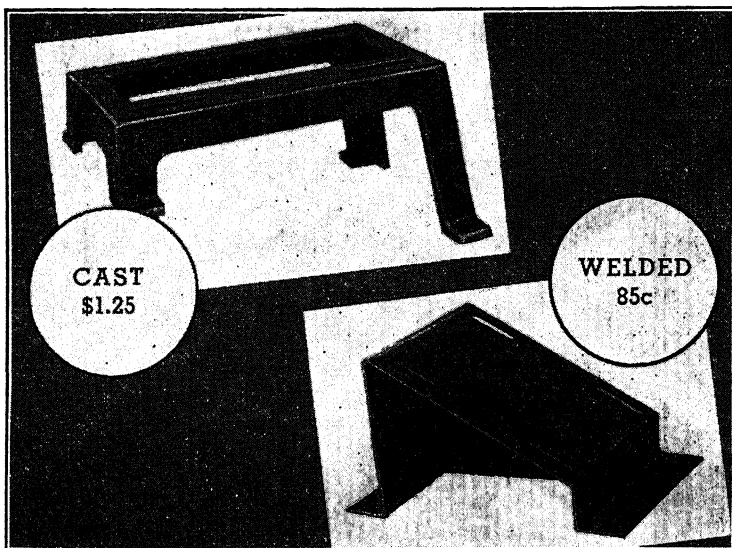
A generator base for a grain mill. The cast iron design superseded cost \$1.25; the new welded steel design costs only 85c. Weight reduction was 55%.
